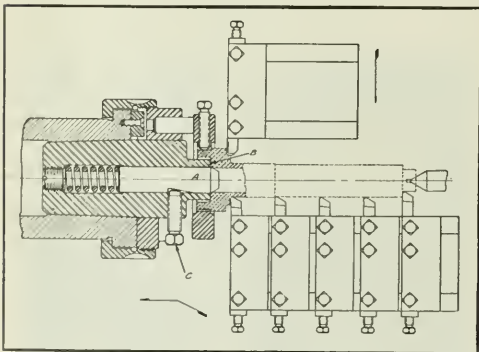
Tool Set-up used in rough-turning Transmission Clutch Shaft
